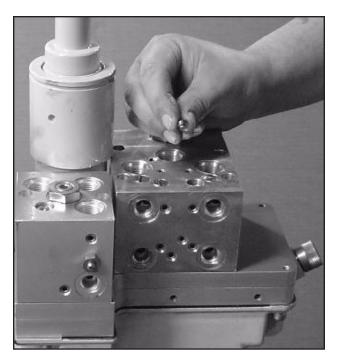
Use a magnet to retrieve the Relief Valve Ball Seat.
